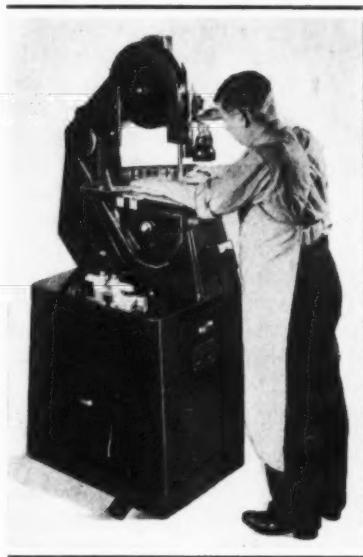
Band-Sawing, Filing and Polishing Machine with Deep Throat
